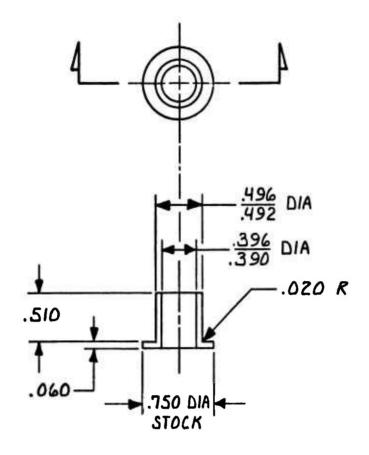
Machining of the Flanged Barrel Section of the Transmission Housing.
